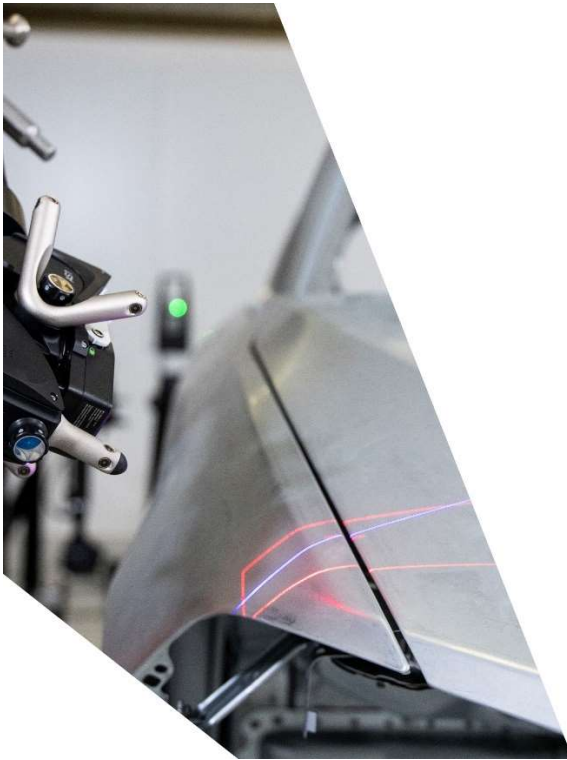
Robotic inspection of a car body panels gap and flush. Laser tracker is tracking a laser scanner attached to a robotic arm. [32]
